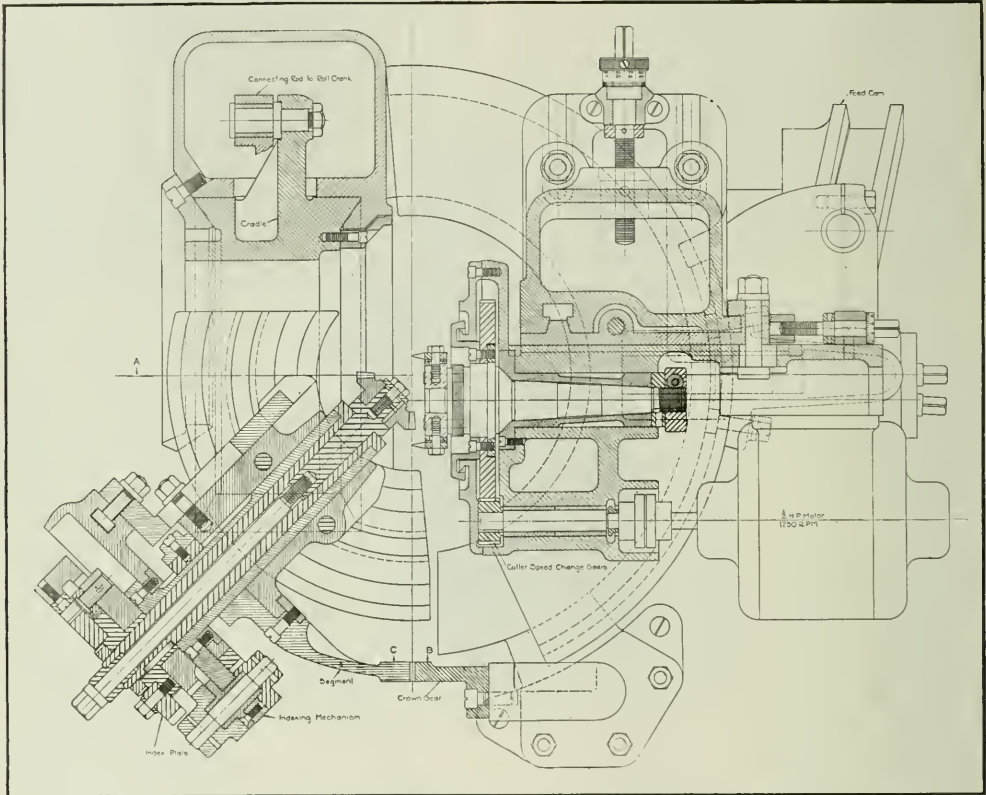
Sectional Plan View of Generator for cutting Small Spiral Bevel Gears
